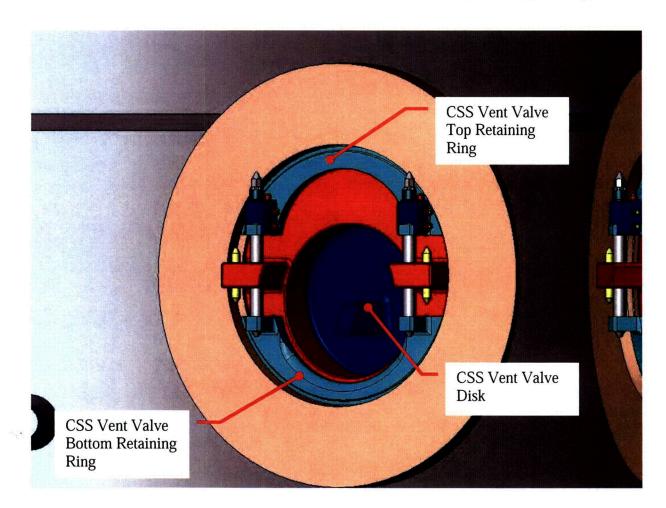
Typical core support shield (CSS) vent valve – inside view – for the B&W-designed PWRs
